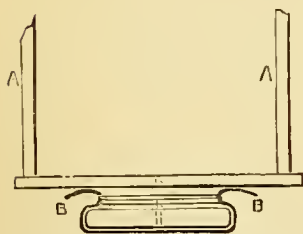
ENLARGED VIEW OF VALVE. A, End of Barrel. B, Silk tied over Block. Dotted lines show pin-hole.
